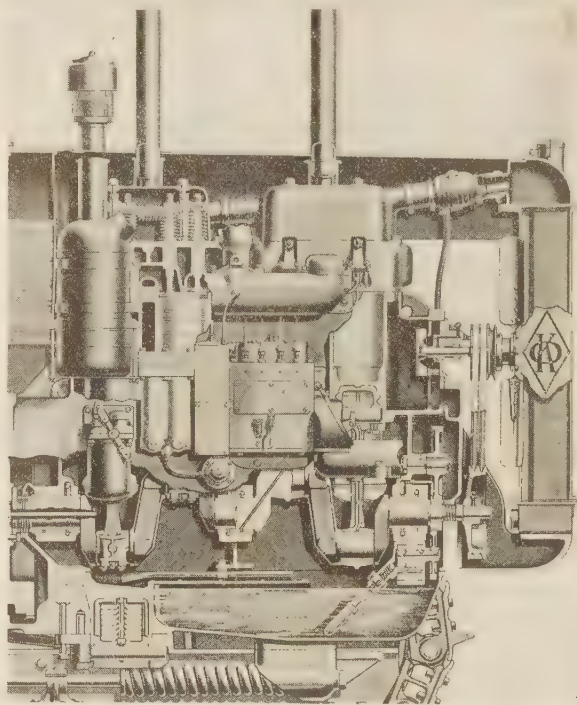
SECTIONAL VIEW OF THE ALLIS-CHALMERS OIL ENGINE
